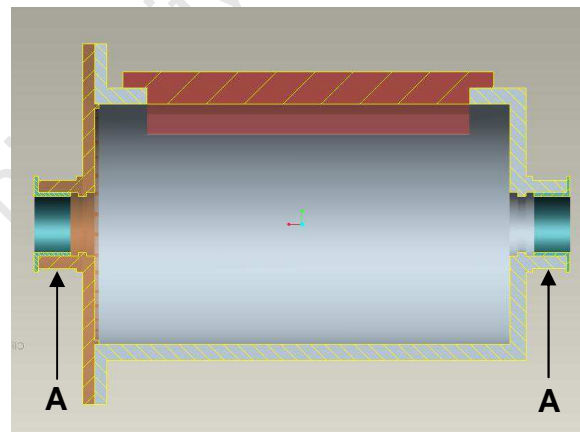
Cross-sectional view of mill assembly. A - shoulder supports.
